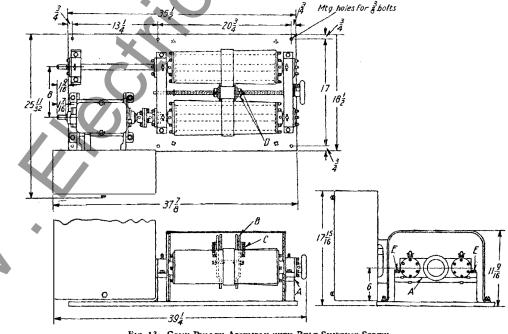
CONE PULLEY ASSEMBLY WITH BELT SHIFTING SCREW
